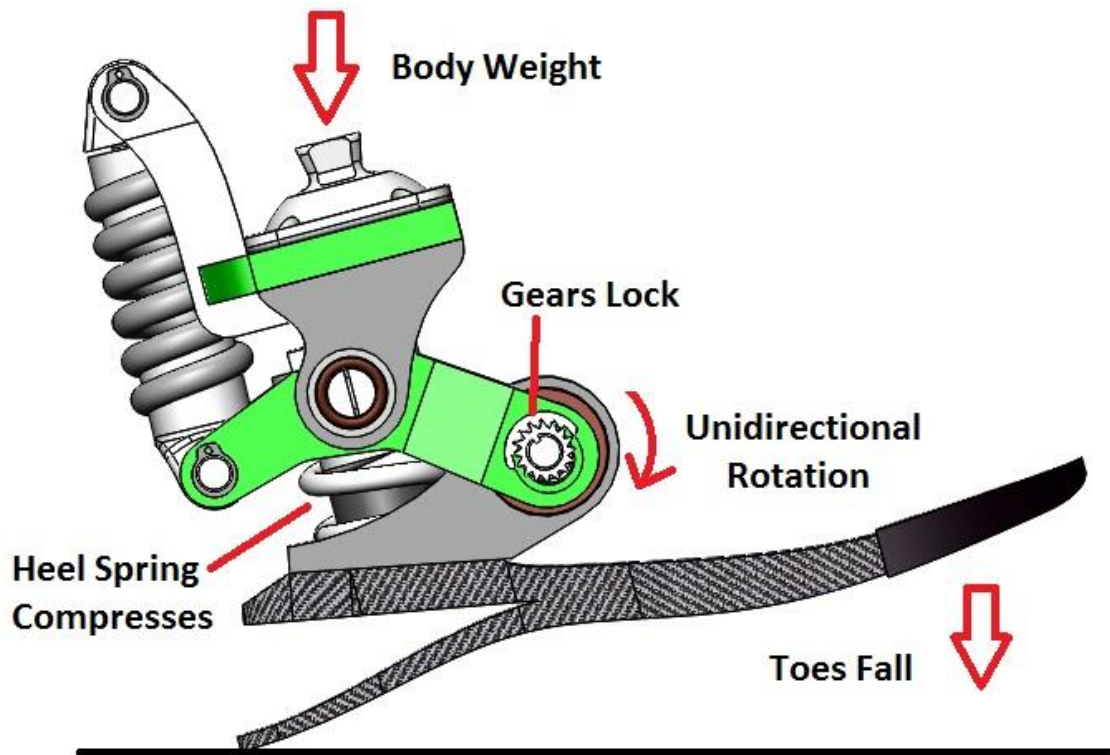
UNIDIRECTIONAL BEARING PERMITS ONLY THE KEEL TO LOWER MATCHING GROUND SLOPE DURING HEEL STRIKE.
